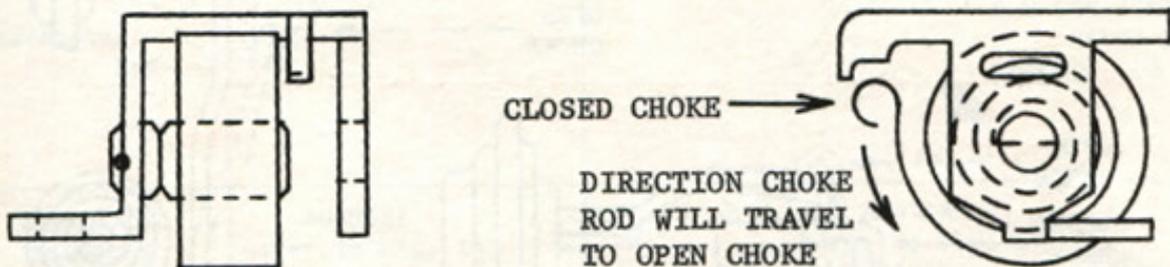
FIG. III - CHOKE THERMOSTAT ASSEMBLY - V-8 exc. 283 & 327 (275 HP)
